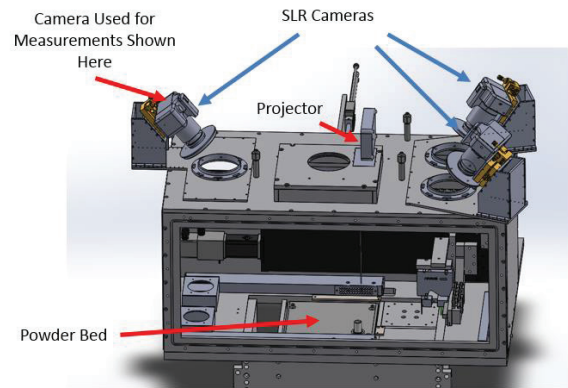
Configuration of digital fringe projection system on the laser powder bed fusion machine chamber.
